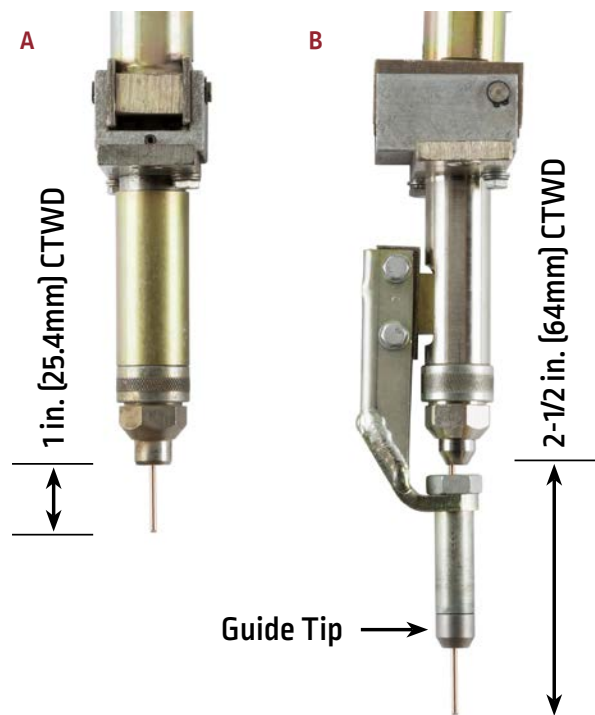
A, Positive contact assembly; B, Linc-Fill Long Stickout Extension mounted on a positive contact assembly.
